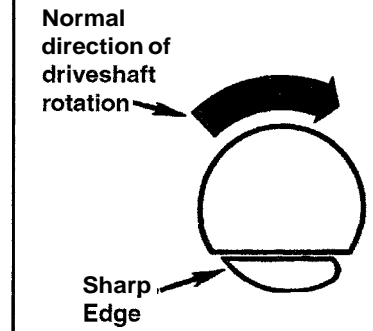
Driveshaft and impeller drive key installation viewed from ABOVE the housing
